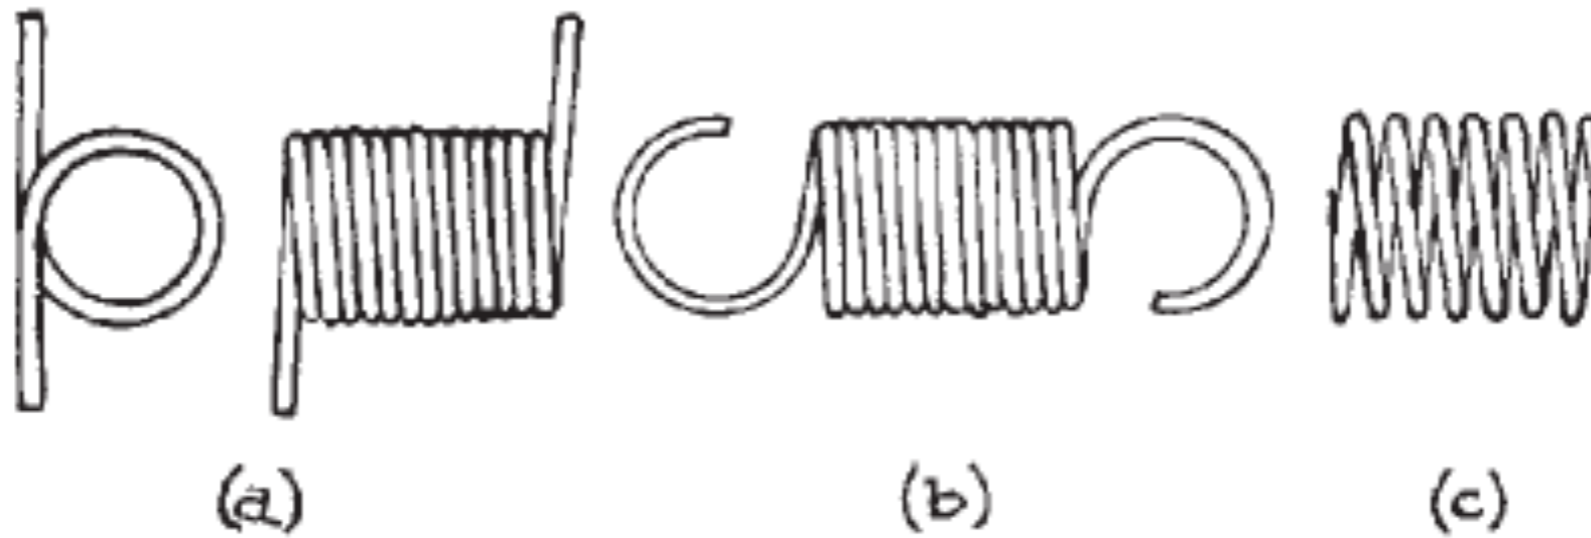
Springs: (a) helical torsion spring; (b) helical extension spring; (c) helical compression spring.
